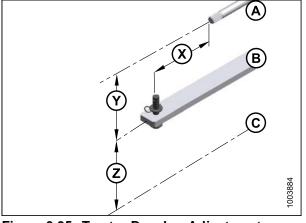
Tractor Drawbar AdjustmentsA - PTOB - Tractor DrawbarC - GroundX - Dimension XY - Dimension YZ - Dimension Z
